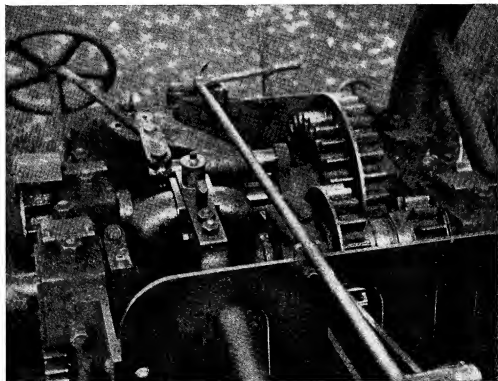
Part of "the works." Note pin and hole method of locking gear-change lever in position
